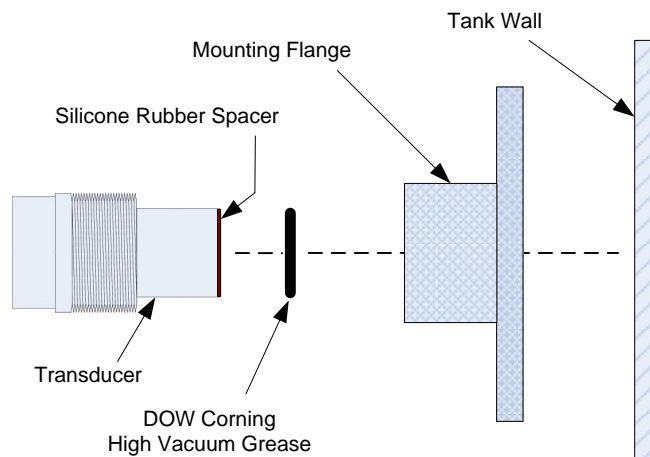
The transducer rubber spacer must be coated with grease before the transducer is inserted into the mounting flange.
